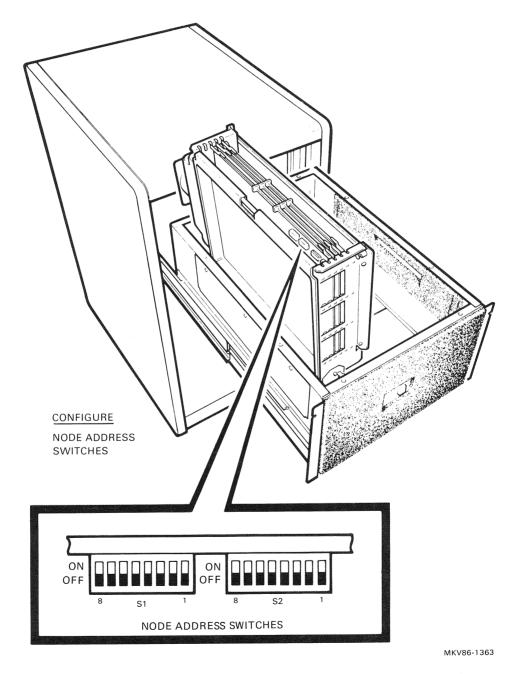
CIPA Mounting Box - Module Access (Sheet 3 of 4)
